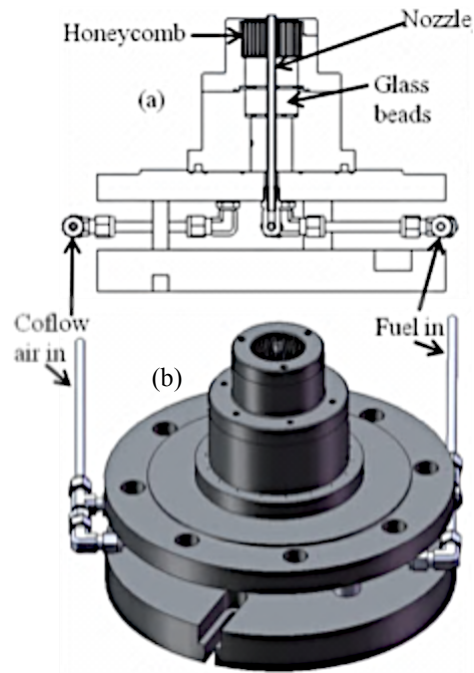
(a) Cross-sectional view Impinging flame burner drawing (b) 3-D view with highlighted parts.
